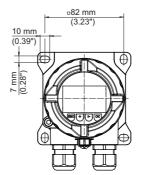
Drilling dimensions for NivoTec 9000 for wall mounting
